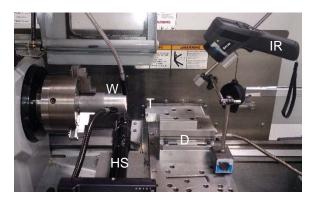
Orthogonal tube turning setup including: workpiece (W), tool (T), high-speed camera, (HS), infrared camera (IR), and dynamometer (D).
